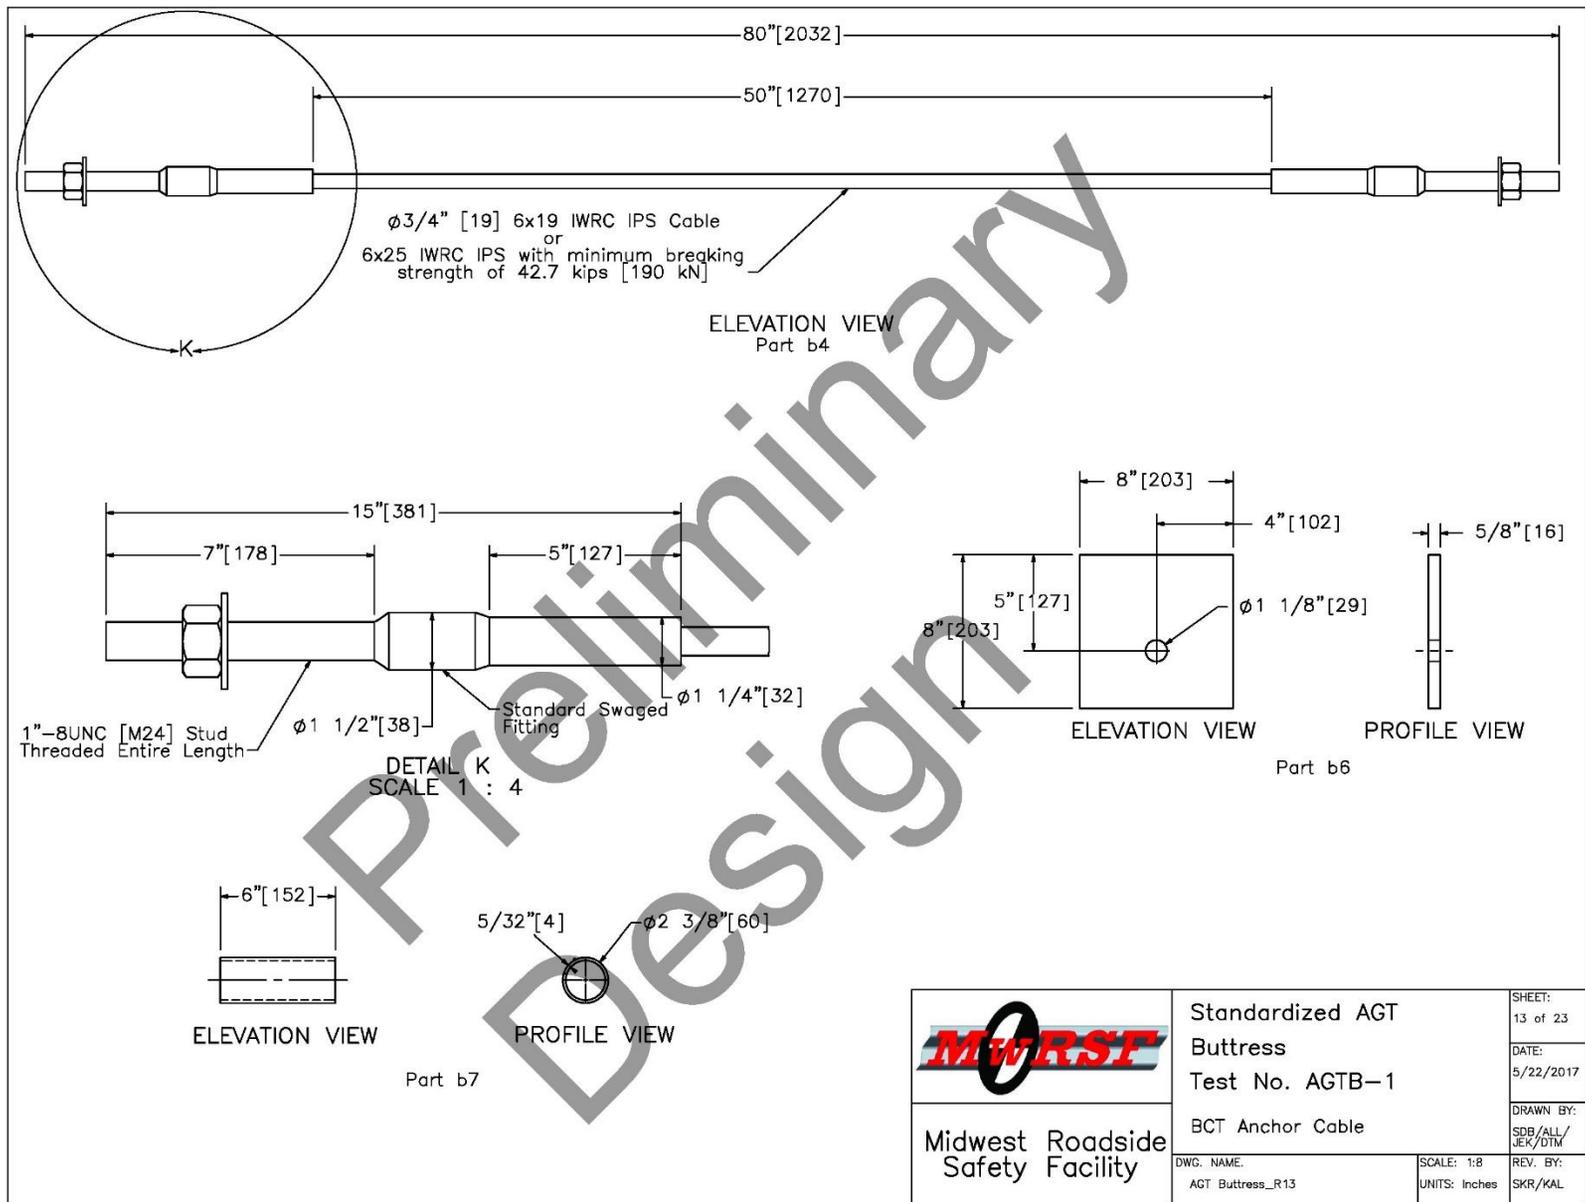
BCT Anchor Cable, Test No. AGTB-1
